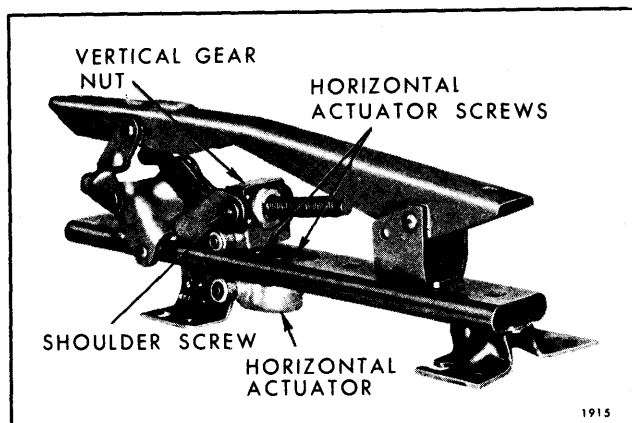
Four-Way Seat Adjuster - "A" Styles
